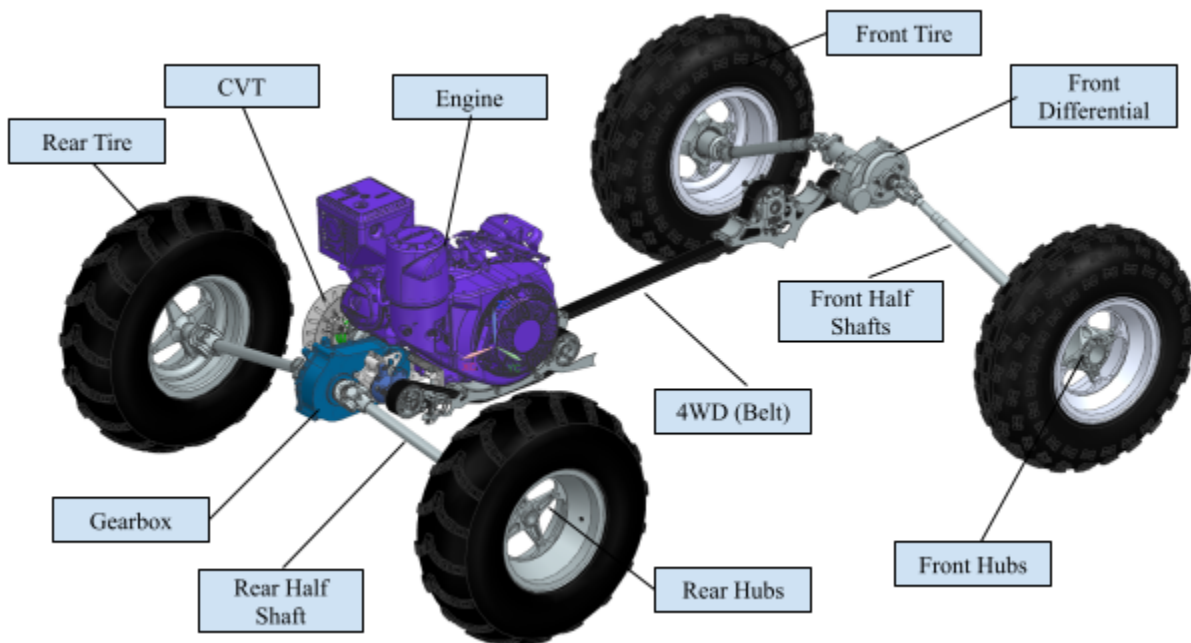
MBR 34 drivetrain CAD. Our area of concern for this project is the gearbox seen on the left side of the image.
